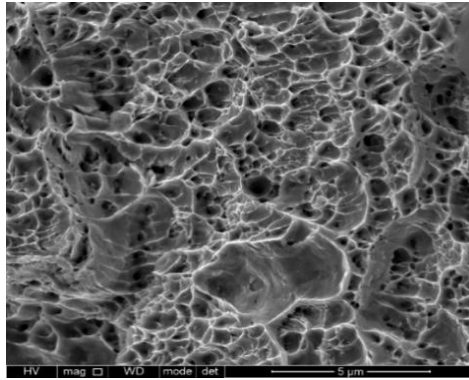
Tensile fracture morphology of the welded joint 2 #
